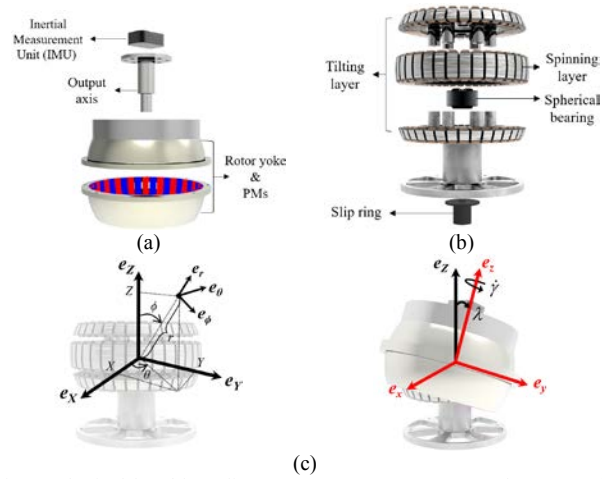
Spherical brushless direct current motor (a) Rotor. (b) Stator. (c) Assembly and coordinate system.
